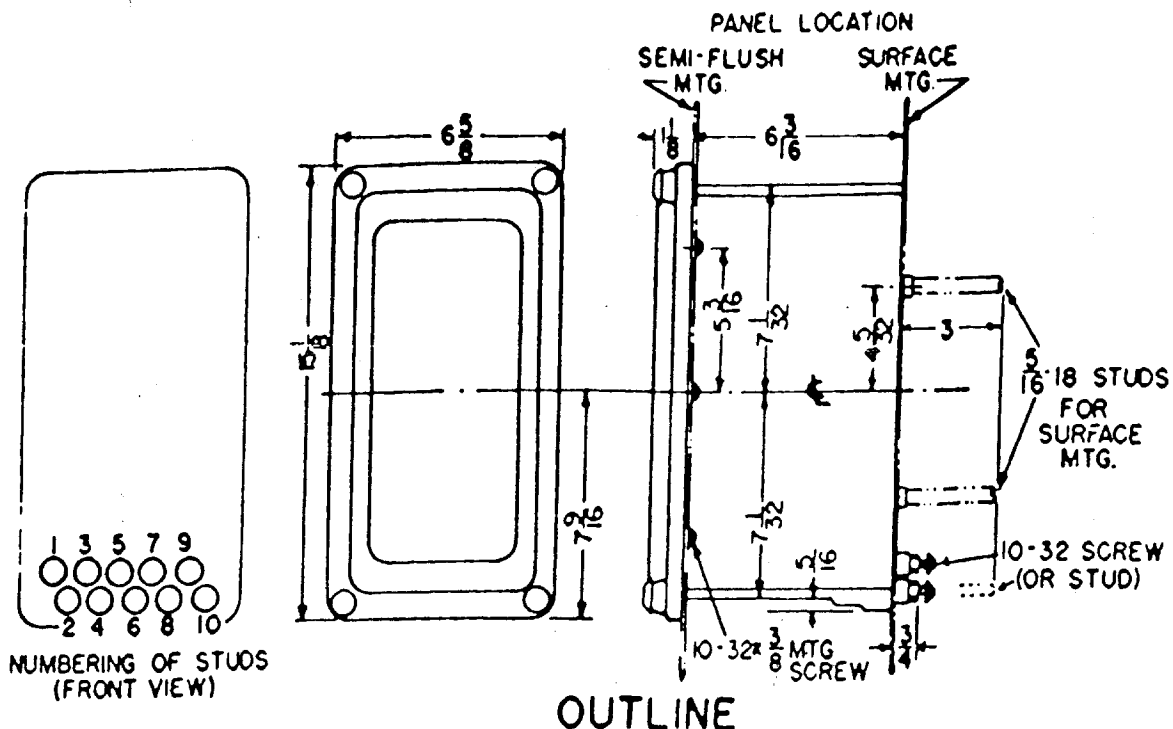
(6209273-2) Outline And Panel Drilling Dimensions For Type CEX11A Relay
